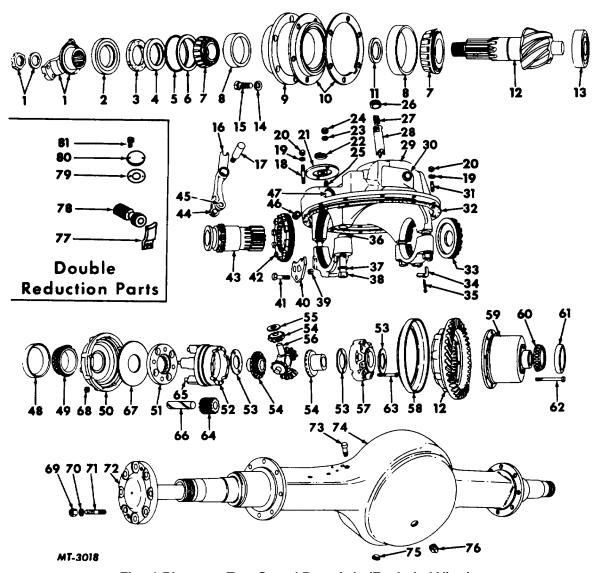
Planetary Two-Speed Rear Axle (Exploded View) (Double Reduction Similar Except for Stationary Sun Gear)
